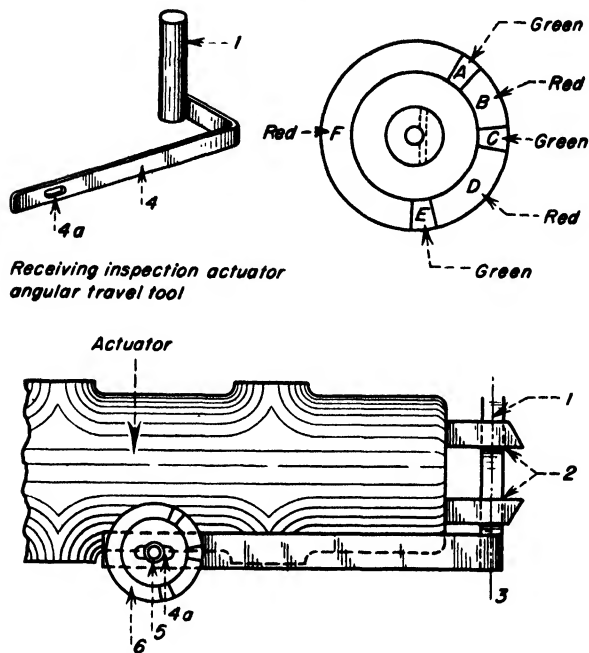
Identification and usage of special tools for checking main gear actuator release shaft travel.
